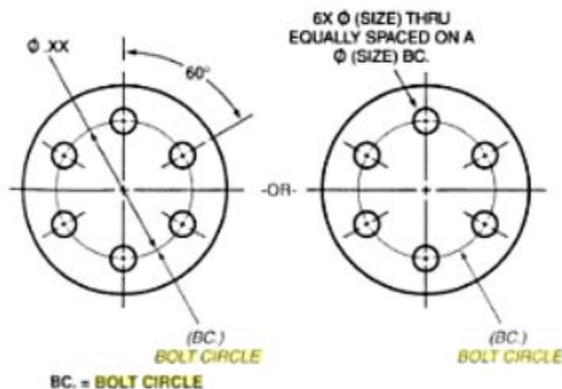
Dimensioning holes on a bolt center diameter
